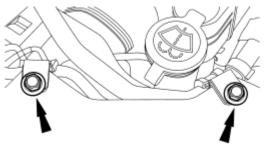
Locating A/C Tubes Nuts Courtesy of FORD MOTOR CO.
